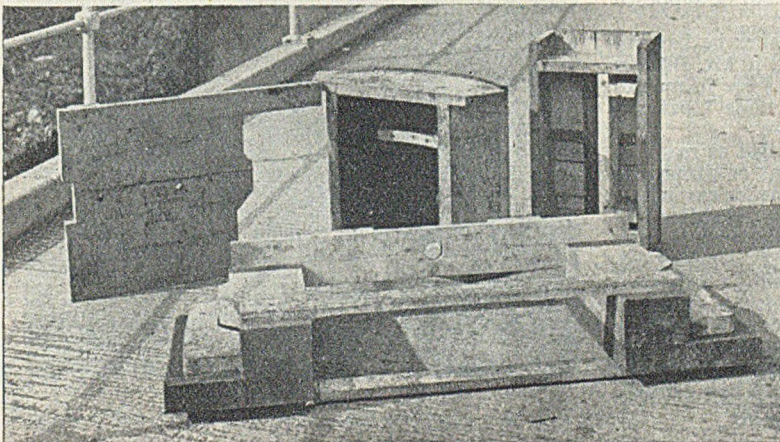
PATTERN EQUIPMENT FOR THE SKIRT CASTING.
